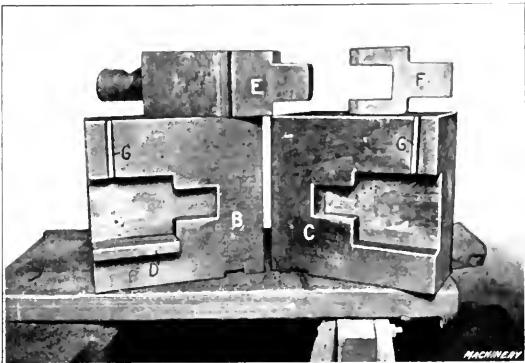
Dies and Tools for making Spring Hangers in a 6-inch Ajax Universal Forging Machine
